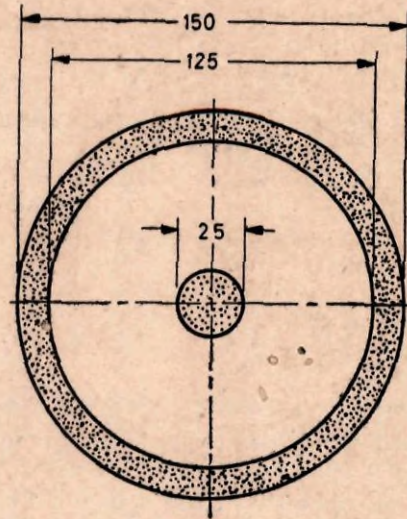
ASSEMBLY FOR TESTING ELECTRICAL RESISTANCE
